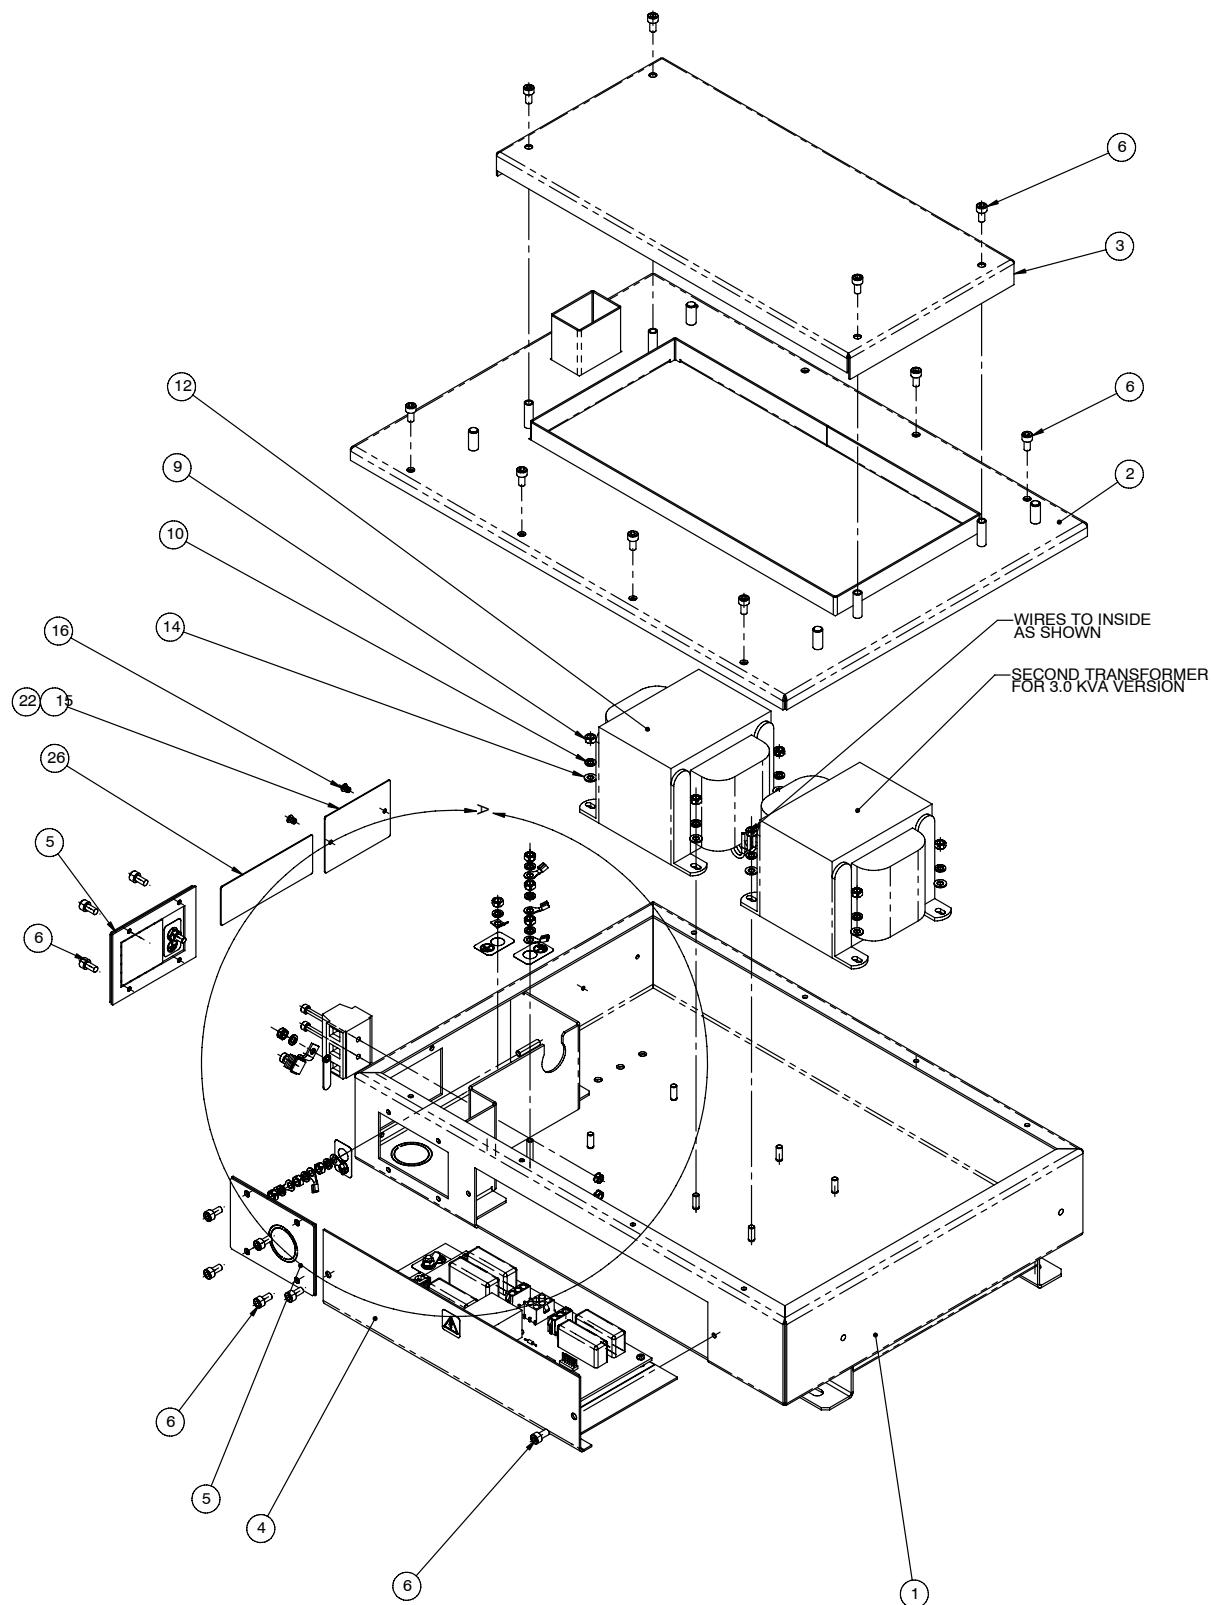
Transformer base assembly, 400/480V Delta (1 of 2)
